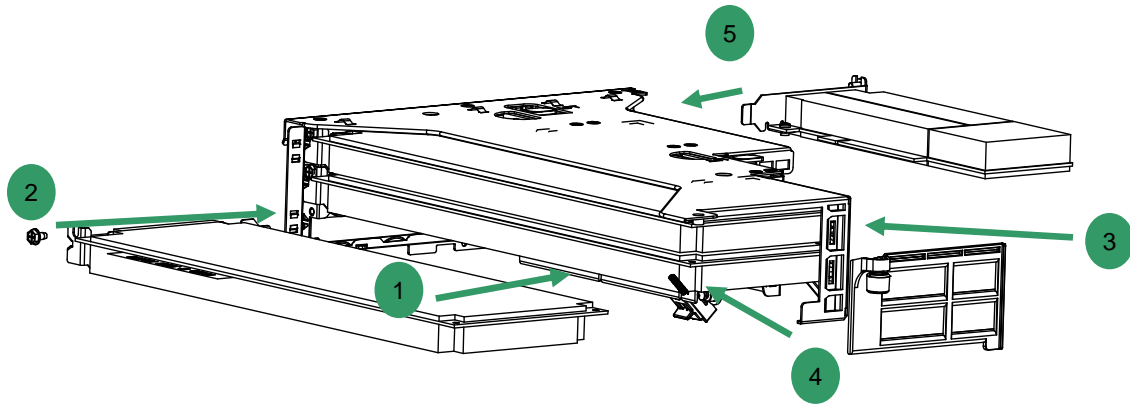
PCI Adapter Subsystem Assembly and Installation (A)
